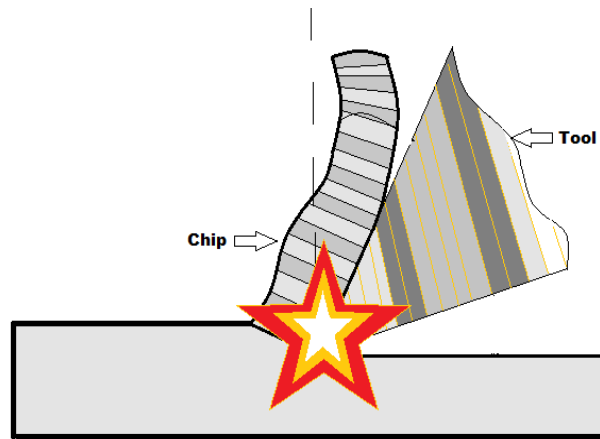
Cutting force and impact zone causing tooth breakage due to impact forces.
